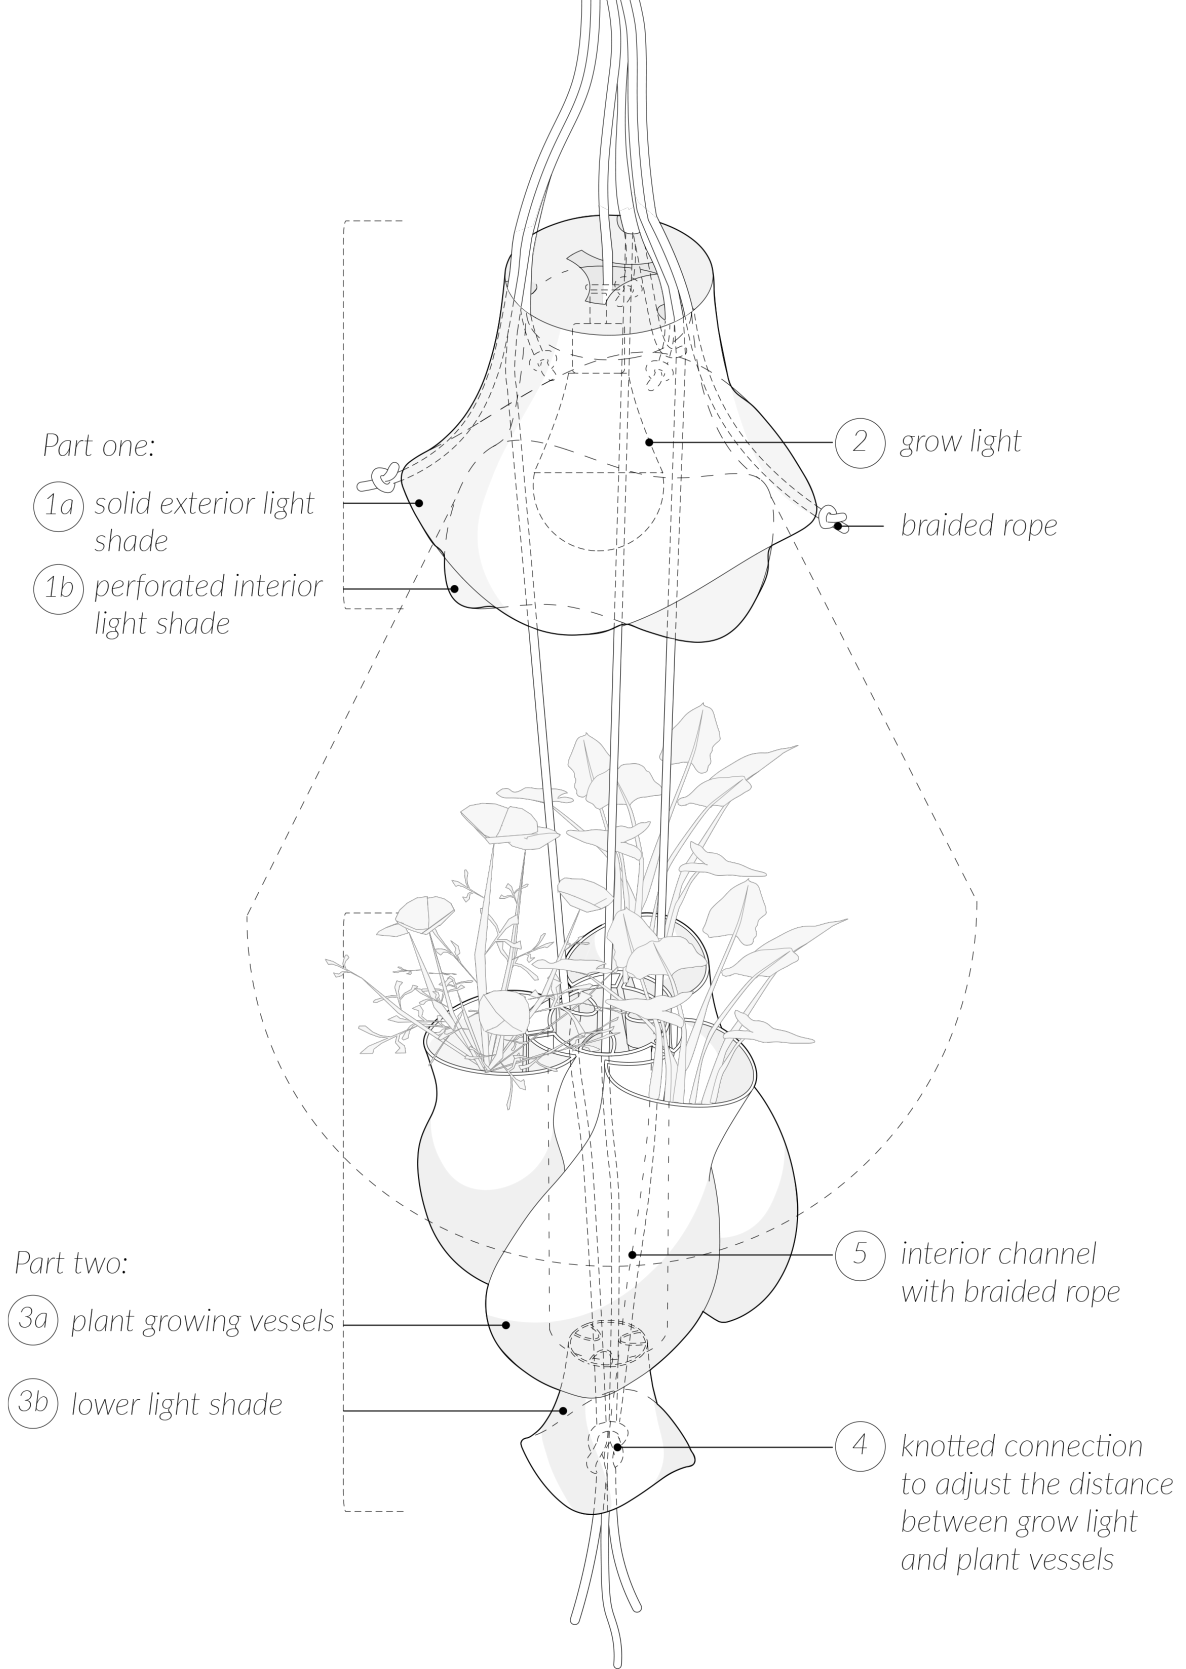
Revised structural concept for the proposed food growing light fixtures.
